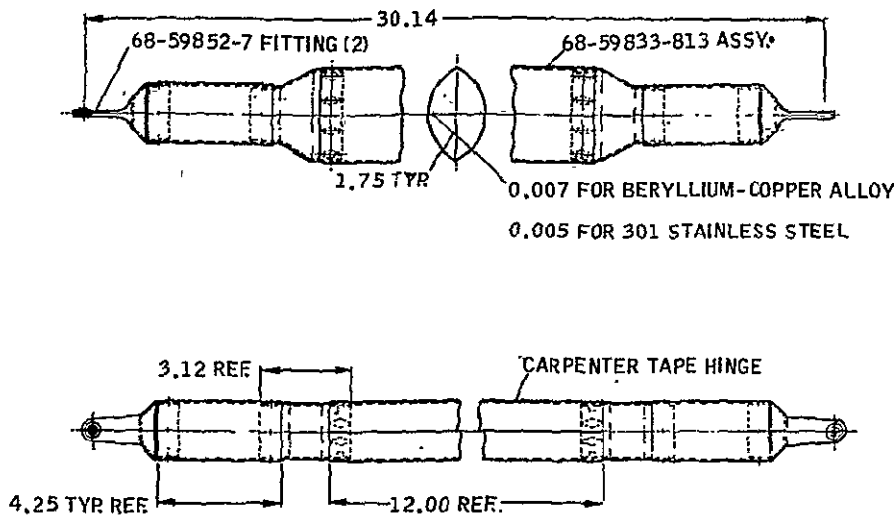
Test Specimen, Carpenter Tape Hinge Assembly
